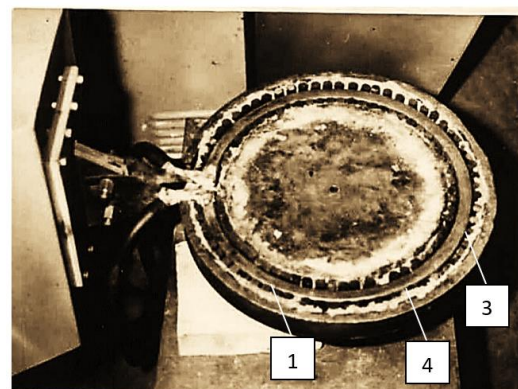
Lower clamping plate with ring inductor and ferrite magnetic circuit
